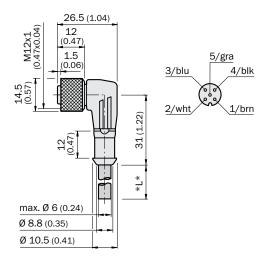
Cable socket, M12, 5-pin, angled, with cable
